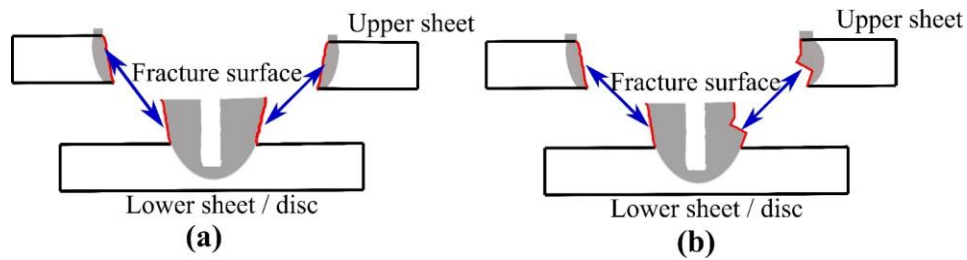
Schematic of (a) nugget pull out (b) nugget fracture
